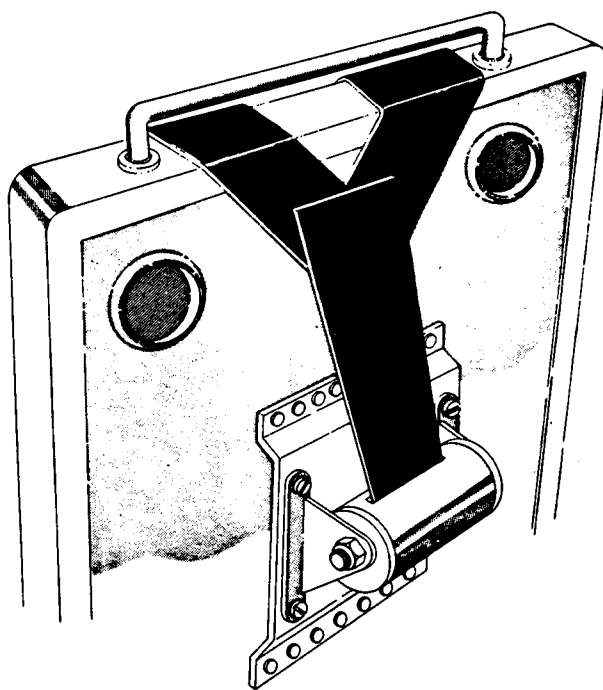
Typical seat mounted inertia reel installation.
